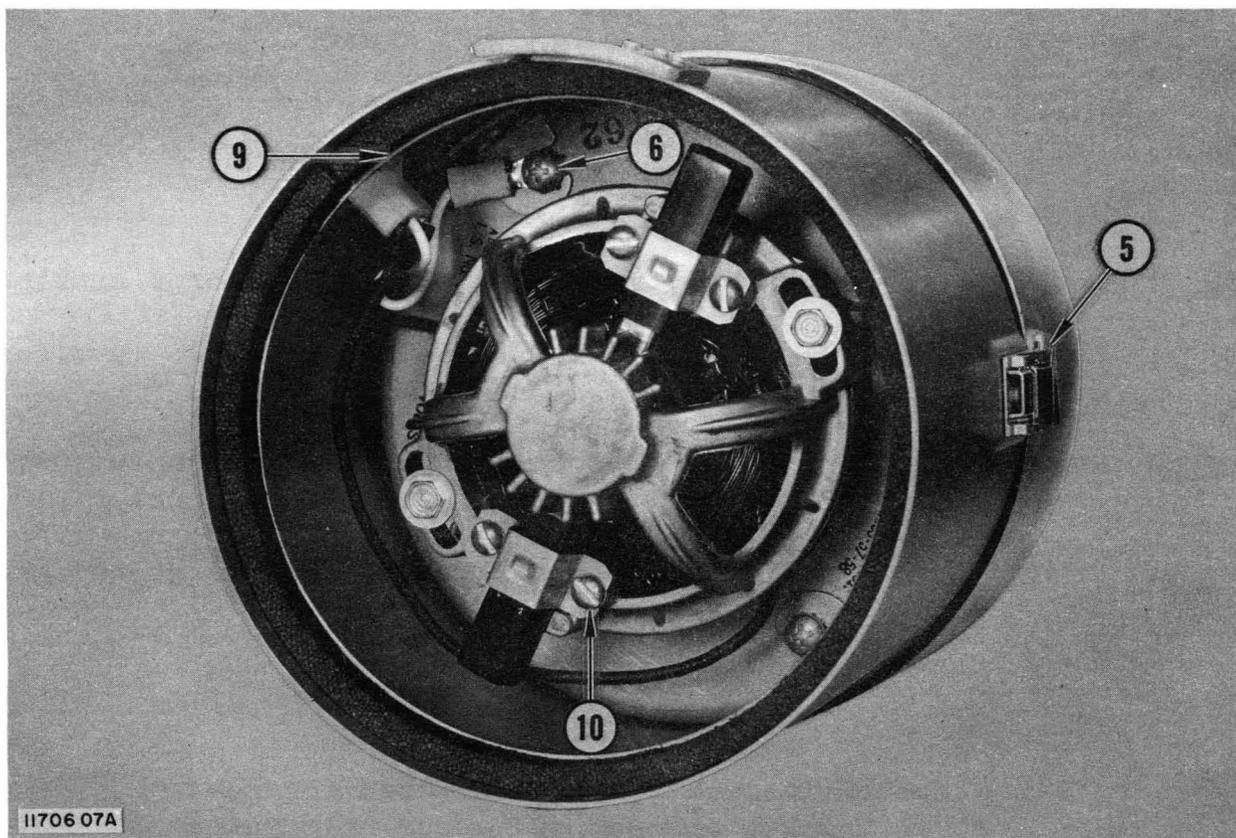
Removing Vacuum Unit Motor and Brushes
